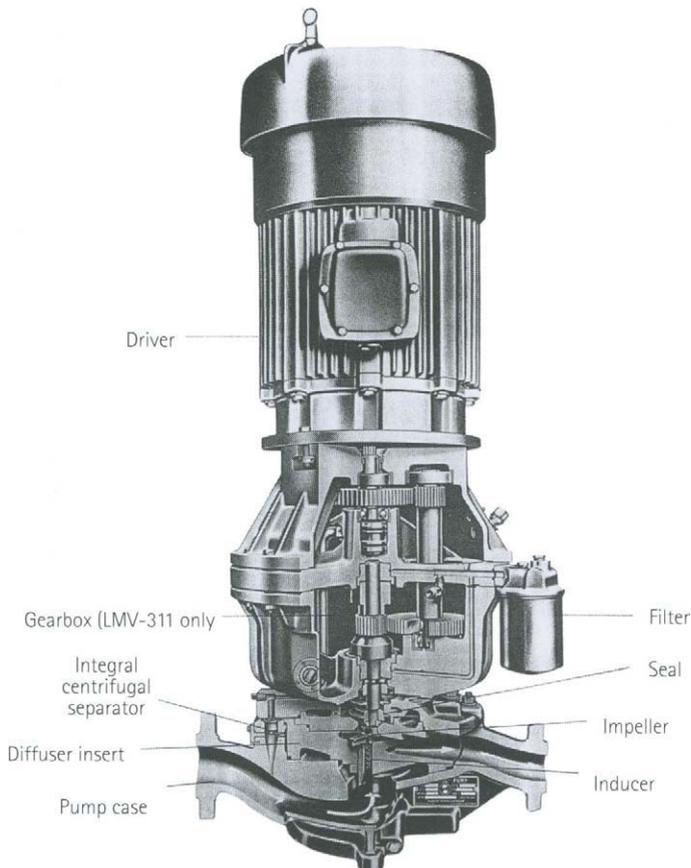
Integral gear centrifugal pump (Courtesy of Sunstrand Corp.)
